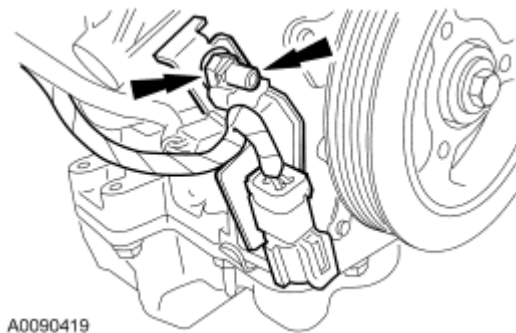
Locating Heated Oxygen Sensor (HO2S) Electrical Connector Bracket
